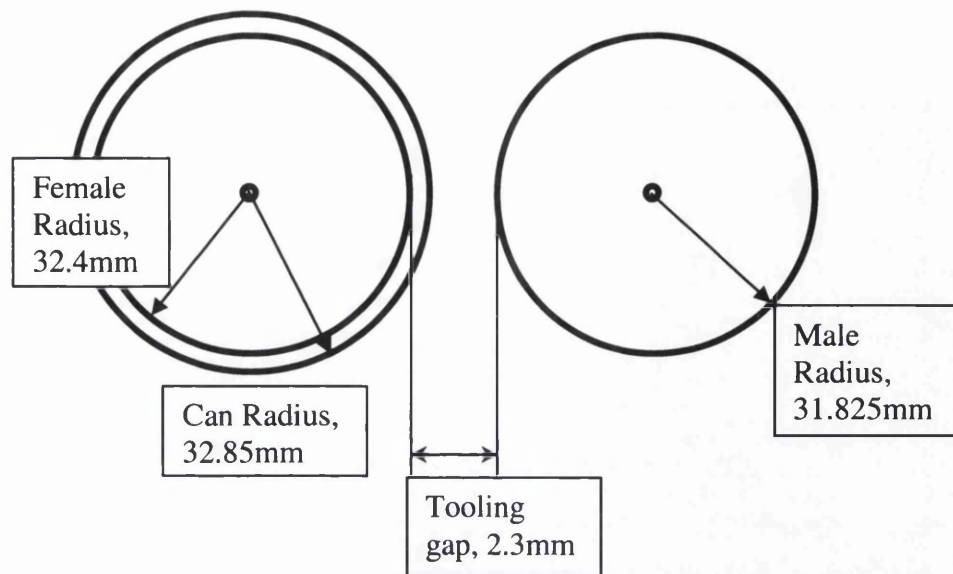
Schematic of typical tooling dimensions for embossing in plan view
